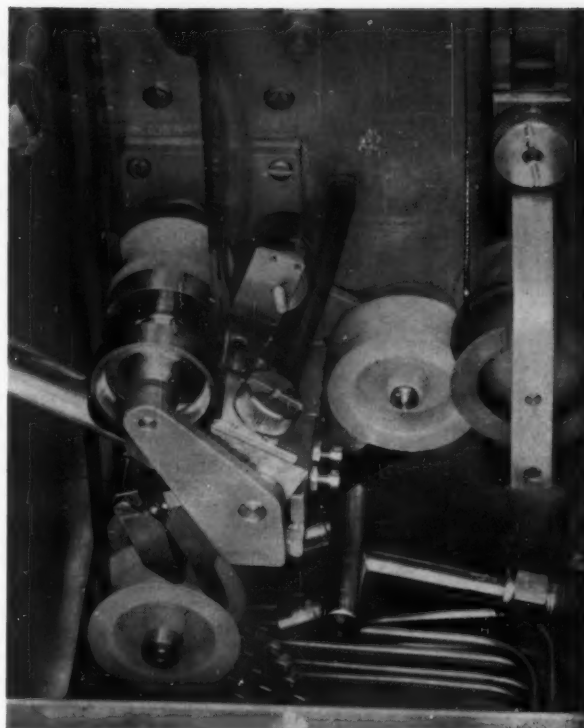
Close-up view of the coating mechanism with rear hopper shown open.
